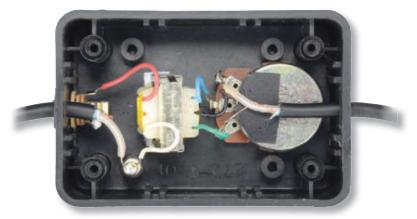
Inside view of keyer in project box showing assembly technique. The black wire is not connected.
